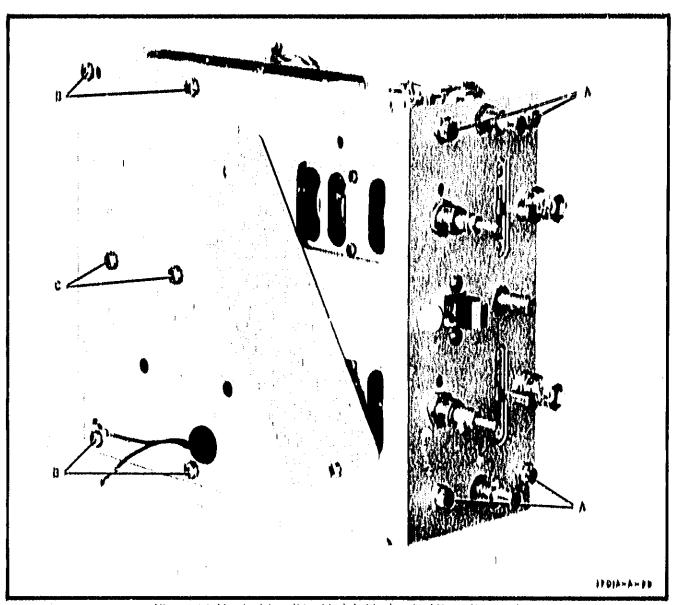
Vertical Amplifier Module Mechanical Parts Romoval
